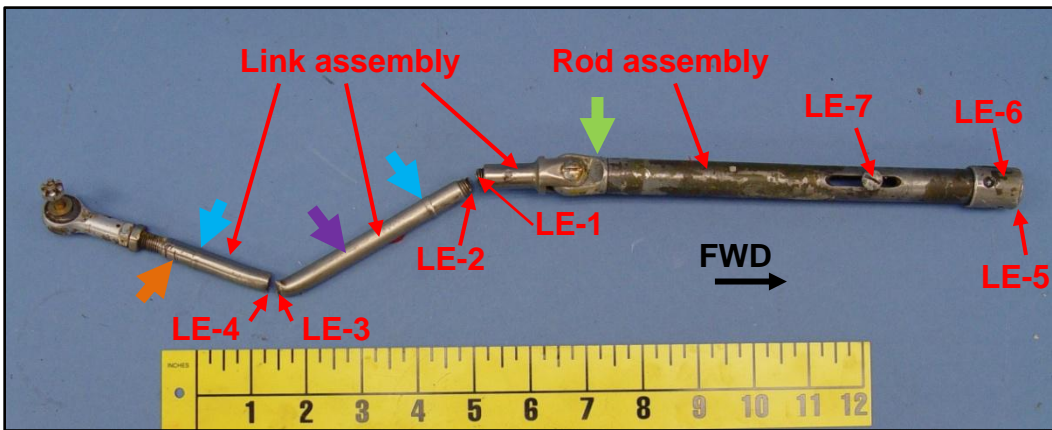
The left elevator trim tab actuator pieces identified in Figure 1 with the rod end and portion of the link assembly removed from the center hinge horn.
